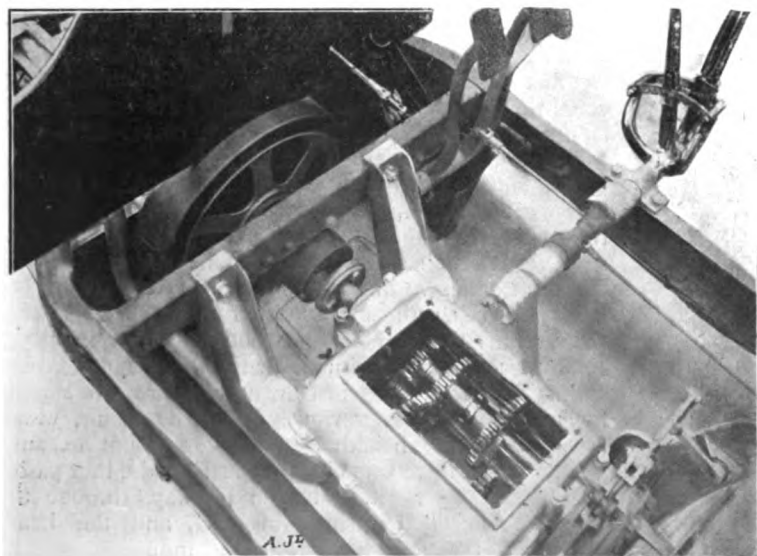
View of the gear-box on the 17-25-h.p. Hotchkiss Car, showing the arrangement of the operating shaft.
